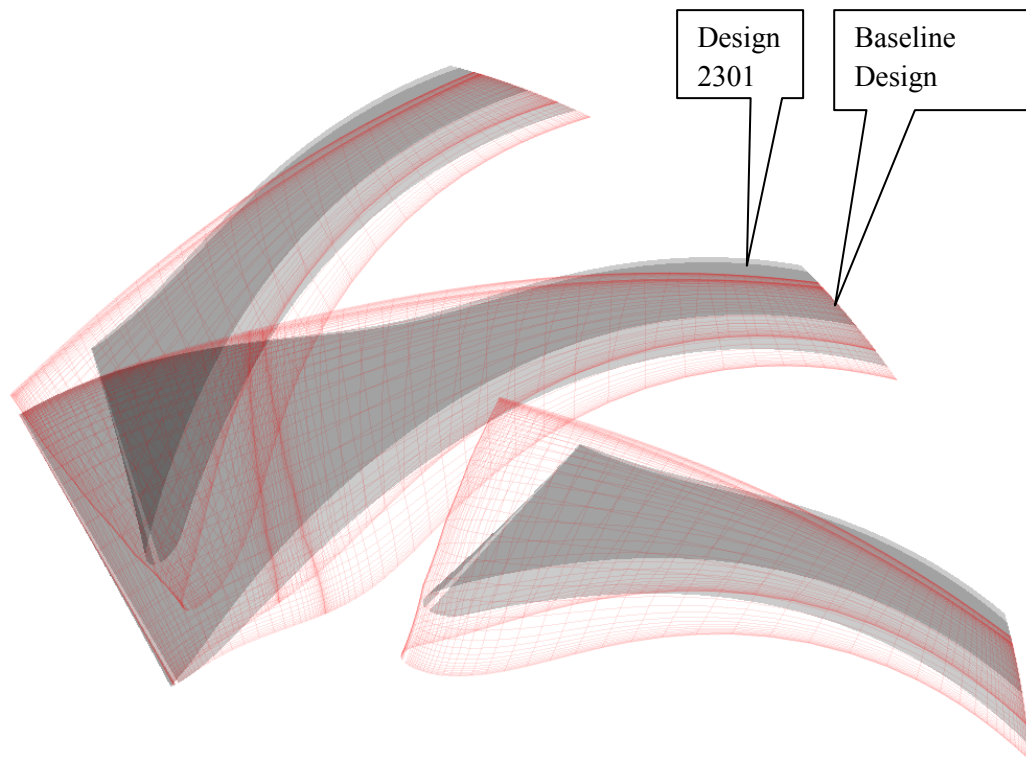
Geometric differences between design 2301 and Impeller 39
